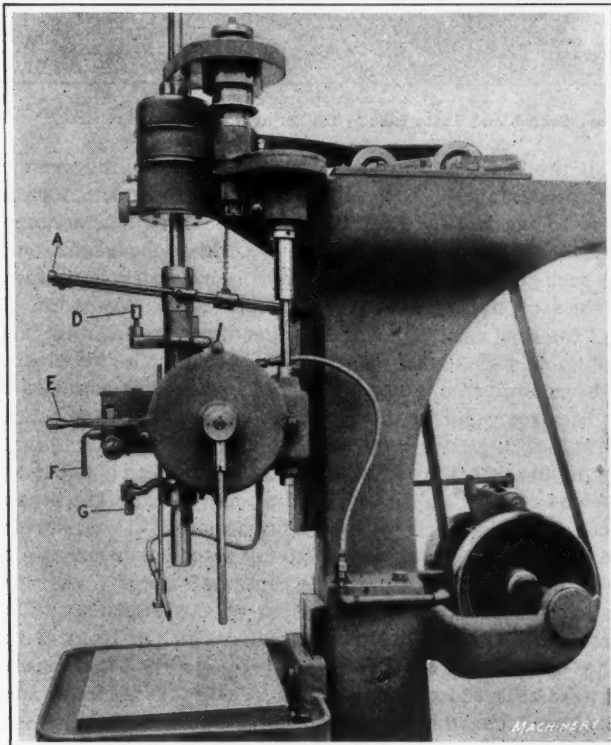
"Avey" Automatic Drilling Machine built by the Cincinnati Pulley Machinery Co.
